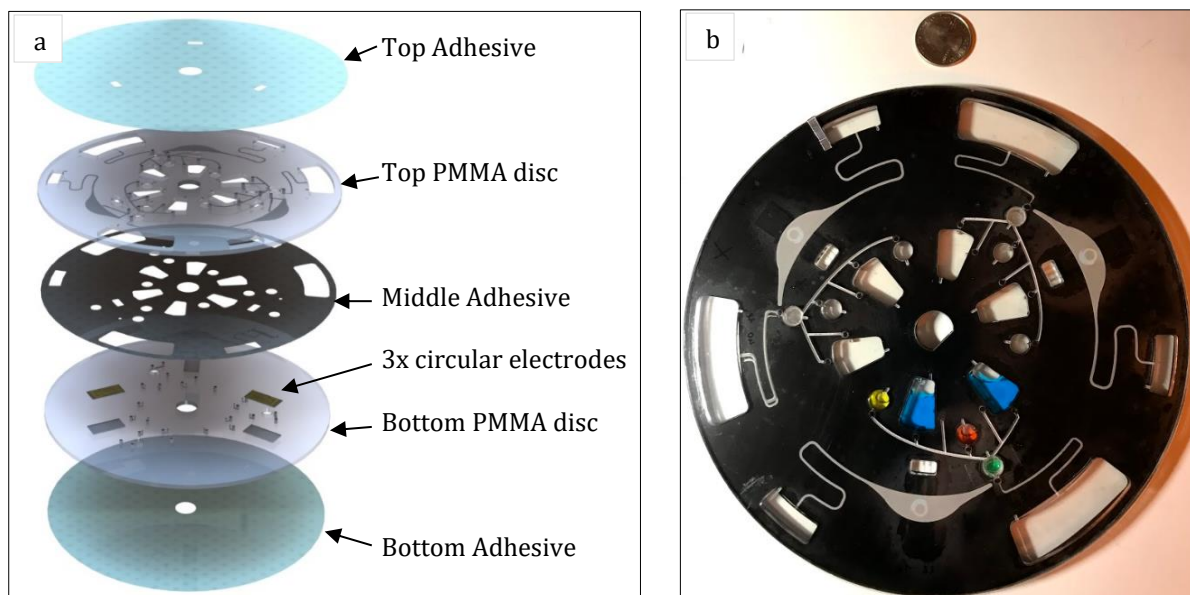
Components and assembly of the disposable disc. (a) Exploded view showing the different layers of the disc. (b) The assembled disc with platinum screen-printed circular carbon electrodes.
